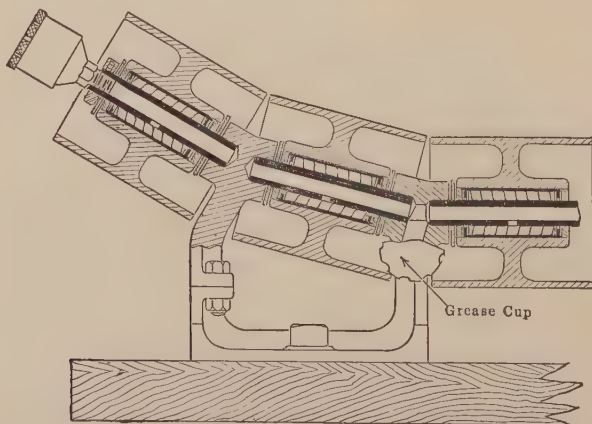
Roller Bearings Applied to 5-pulley Troughing Idler.
